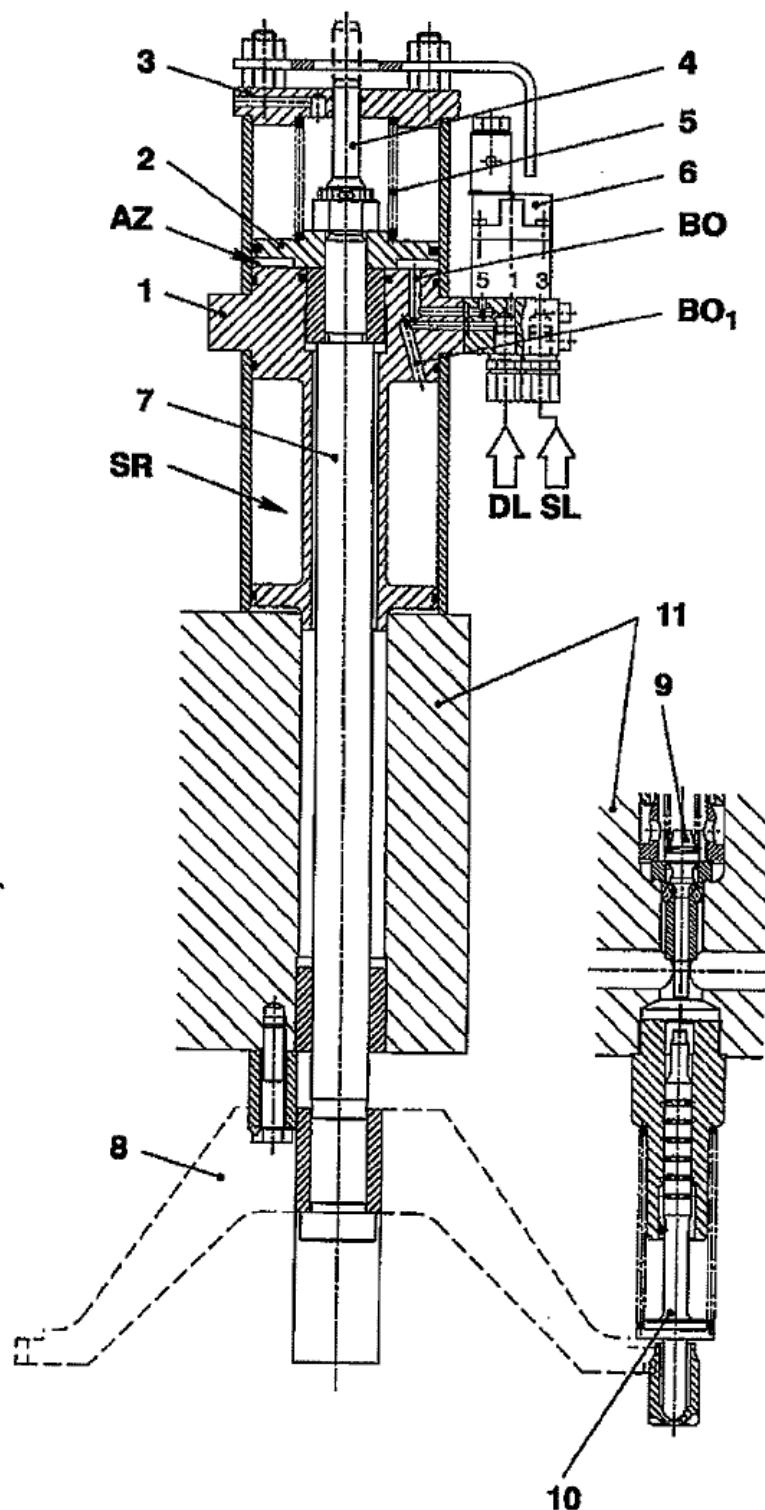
Arrangement of Safety cut-out device on Fuel pump
